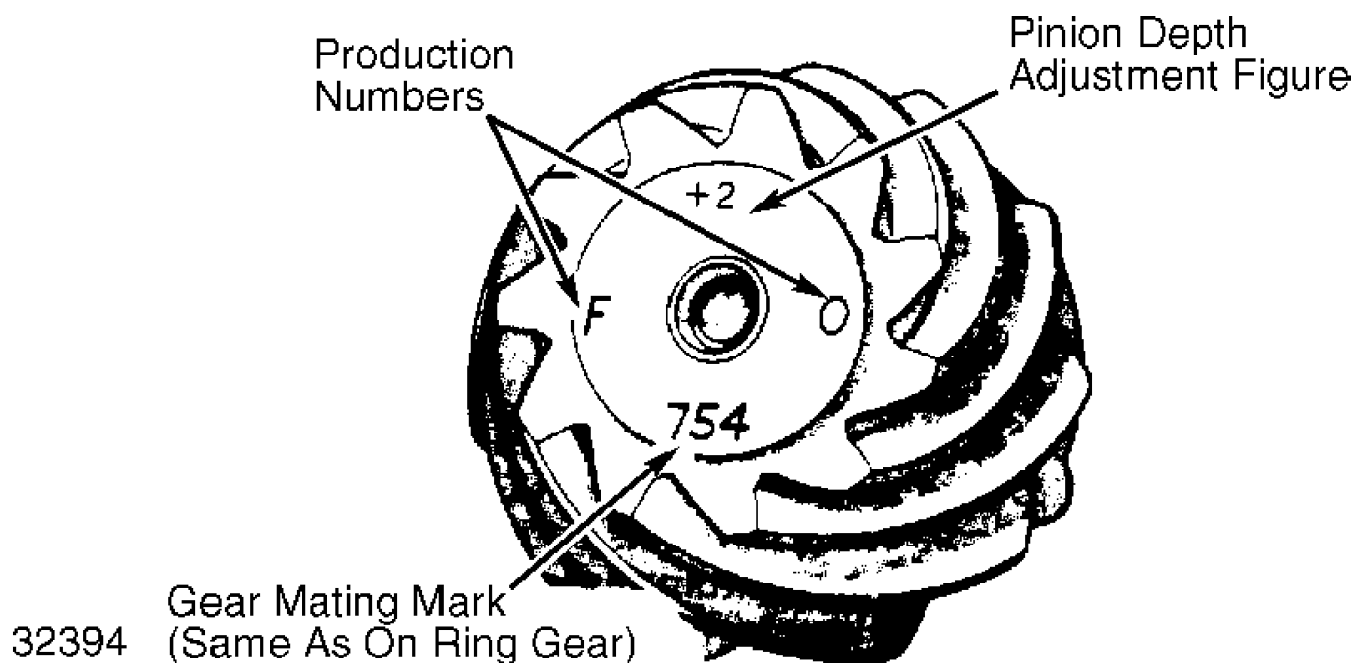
Location of Pinion Gear Markings W/ Depth Adjustment Figures
